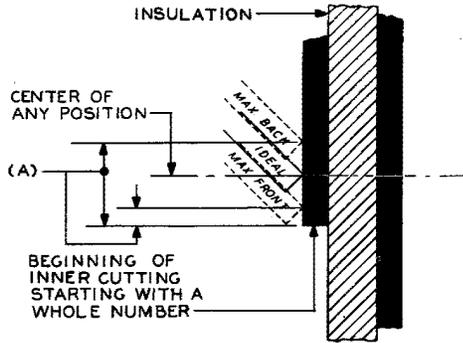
Tolerances for Centering of Contact Springs on Cams (inner cuttings)
